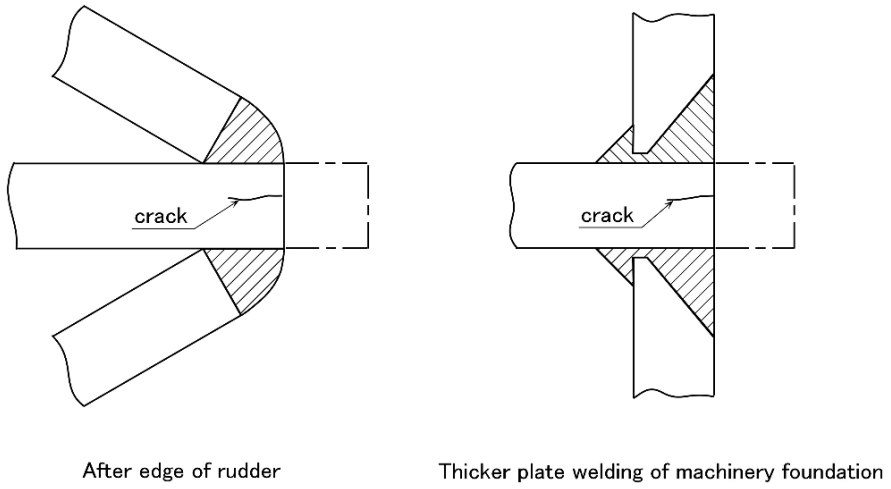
Example of cracking due to welding metal shrinkage
